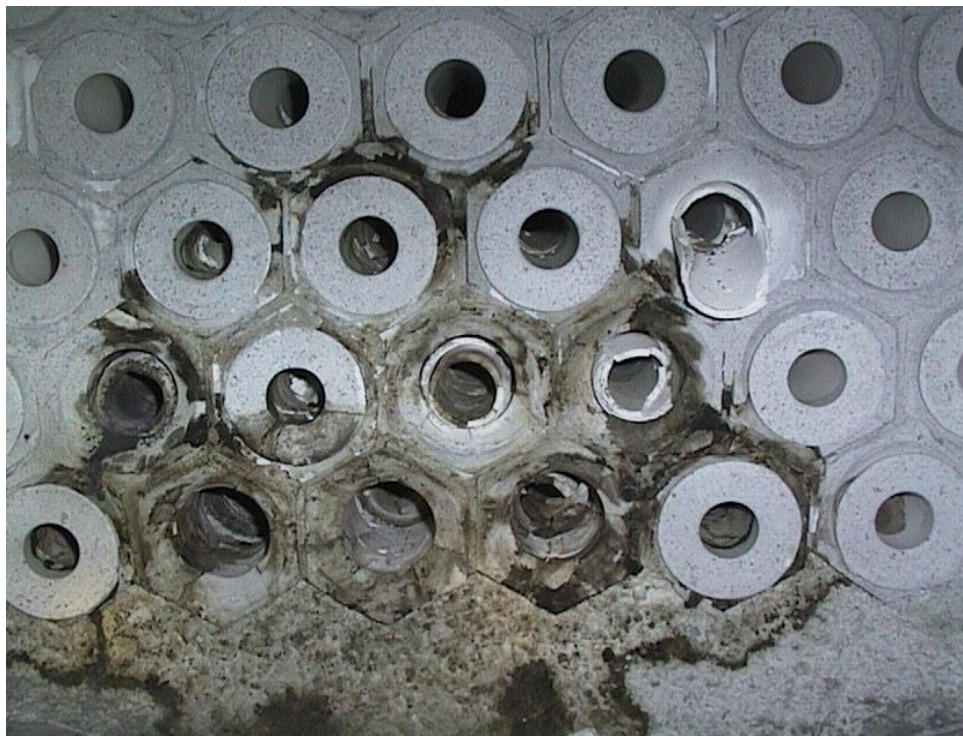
Figure A - Tube Sheet Protection System Failure with Boiler Water Leakage
